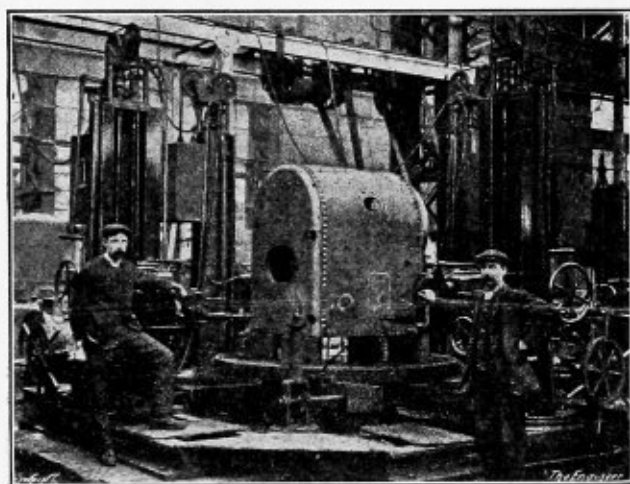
EIGHT-SPINDLE FIREBOX DRILLING MACHINE
